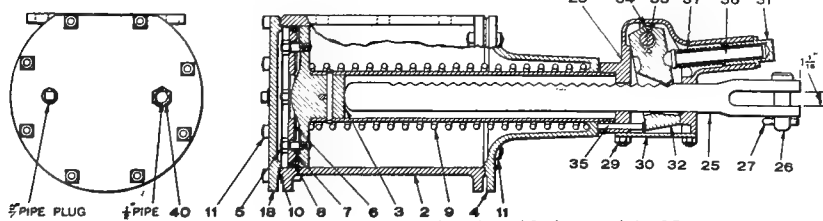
Load Brake Cylinder, 10 in. by 12 in., with Notched Push
